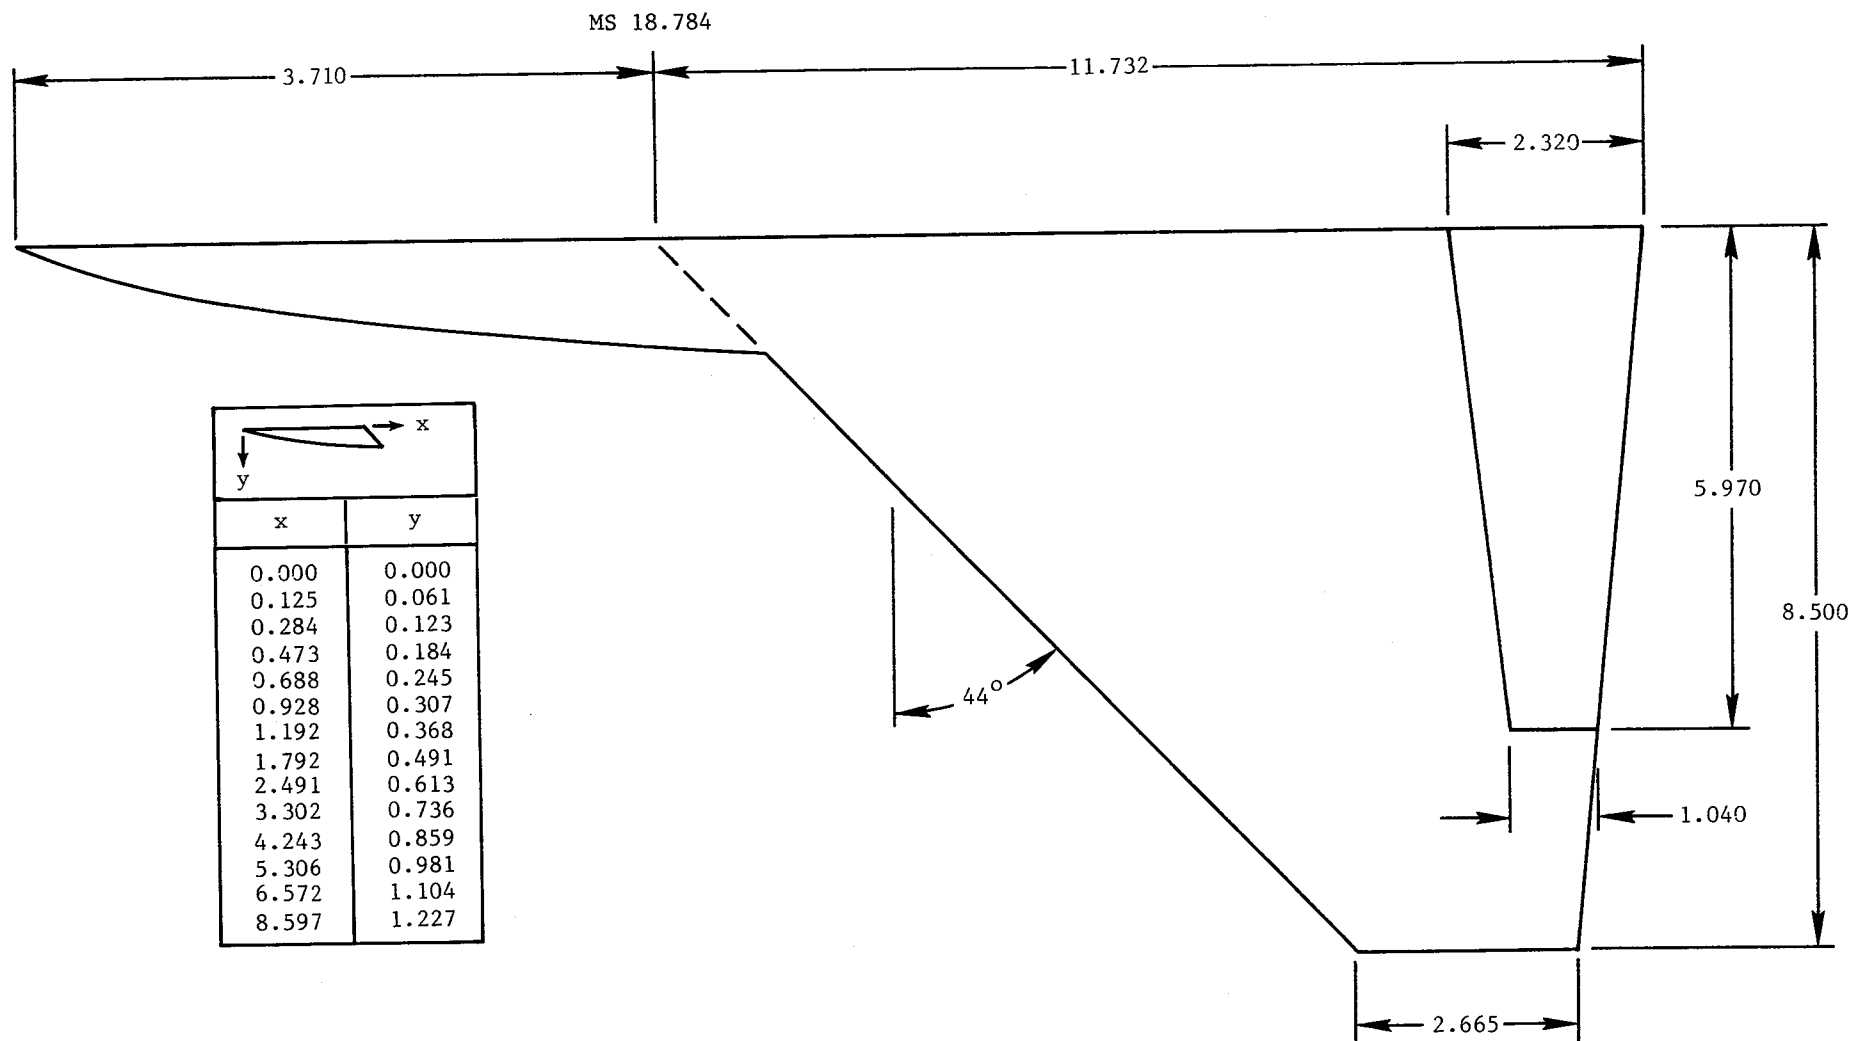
Details of the 44° trapezoidal wing and strake. Linear dimensions in inches.
